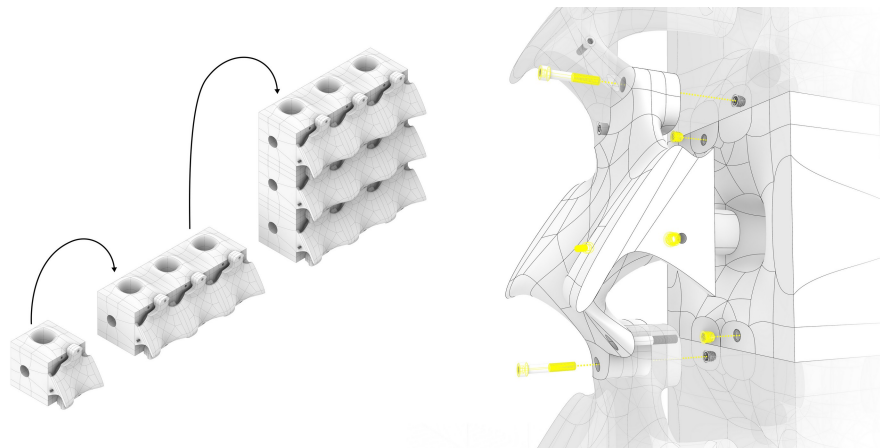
Left, assembly configurations; Right, close-up view of the straight block, showcasing the bolting system and interconnection interfaces.
